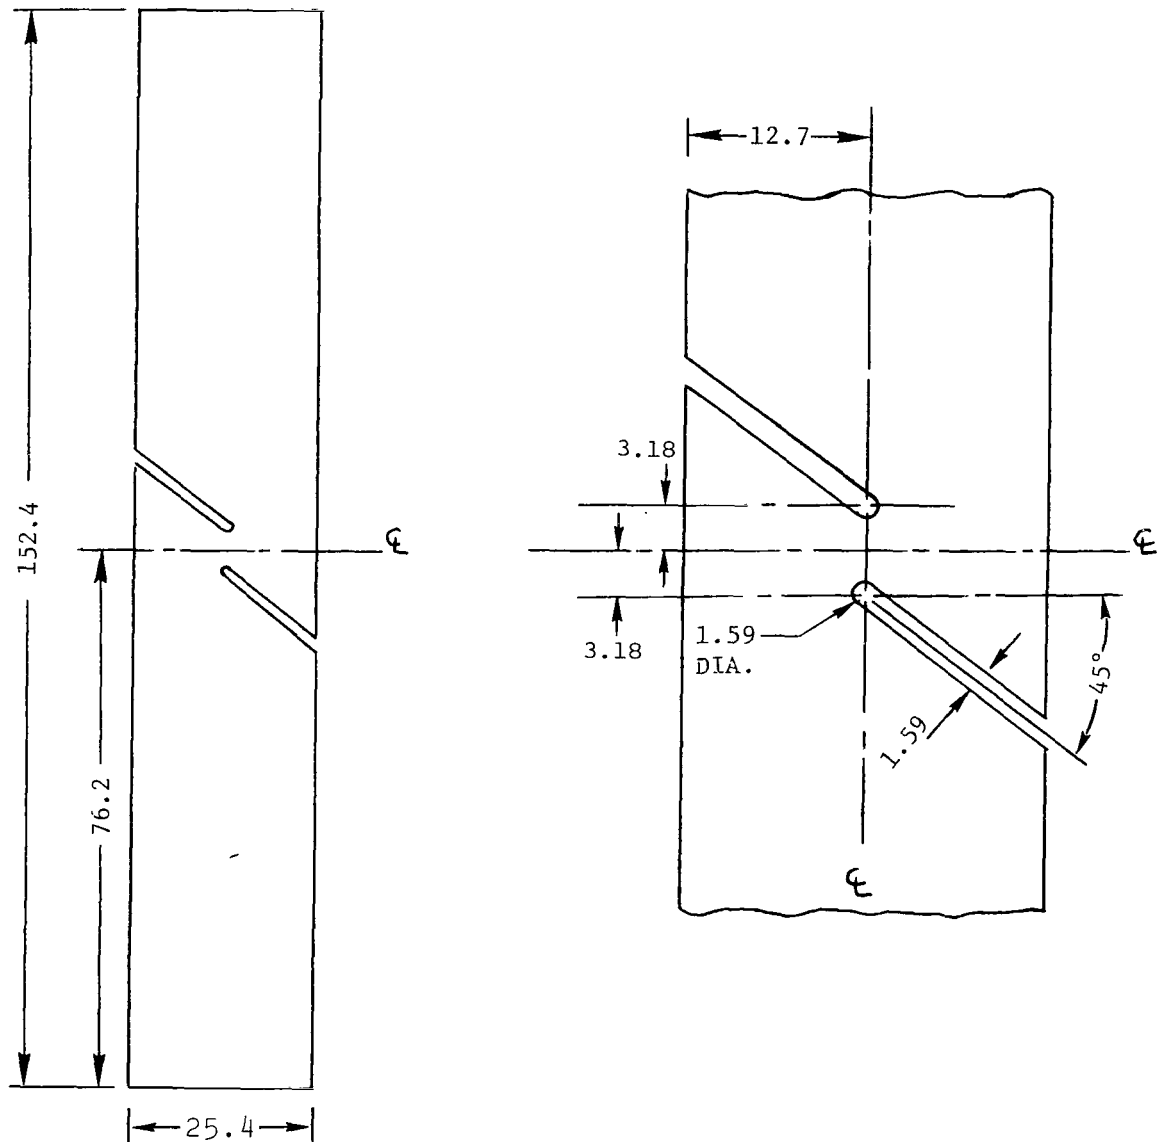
Thin sheet shear specimen. All dimensions in mm (in.) unless otherwise noted. Nominal sheet thickness 1 mm (1 mm = 3.94×10^{-2} in.).
